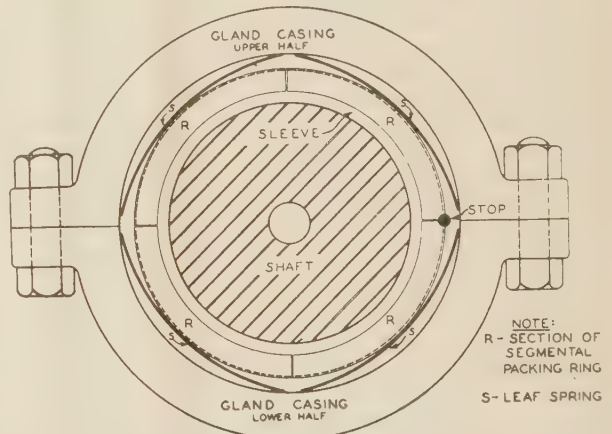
SECTION THROUGH HIGH-PRESSURE SHAFT PACKING, SHOWING ARRANGEMENT OF SPRINGS HOLDING SEGMENTAL PACKING RINGS IN POSITION
